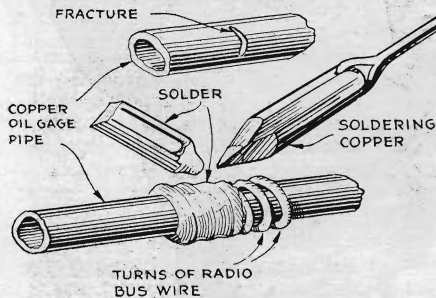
Leak in pipe line can be repaired by winding wire around pipe and soldering.
